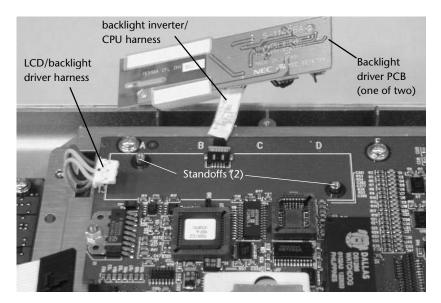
Removal of a 10.4-inch backlight inverter PCB
